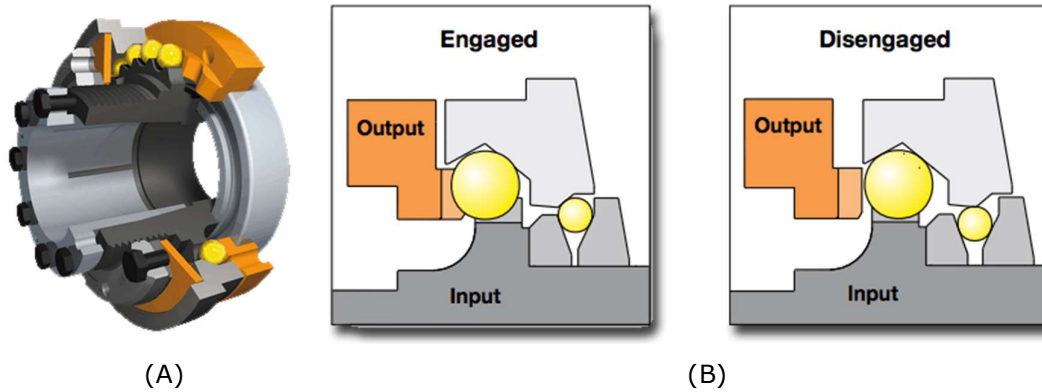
Ball detent torque limiter (a) and engaging mechanism (B) [21]
